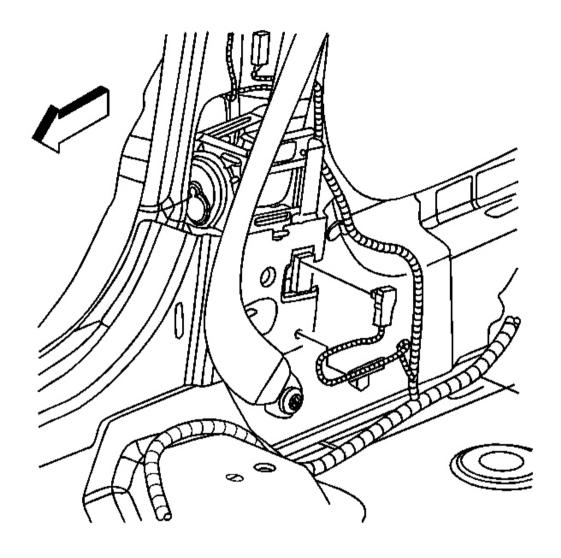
View Of Seat Belt Wiring Harness Routing Courtesy of GENERAL MOTORS CORP.
